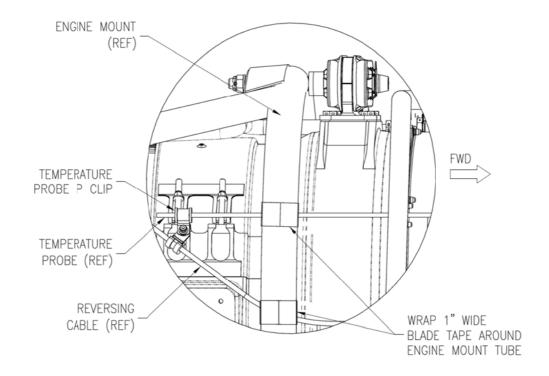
VIEW ON R.H.S OF ENGINE SHOWING INSTALLATION OF BLADE TAPE
